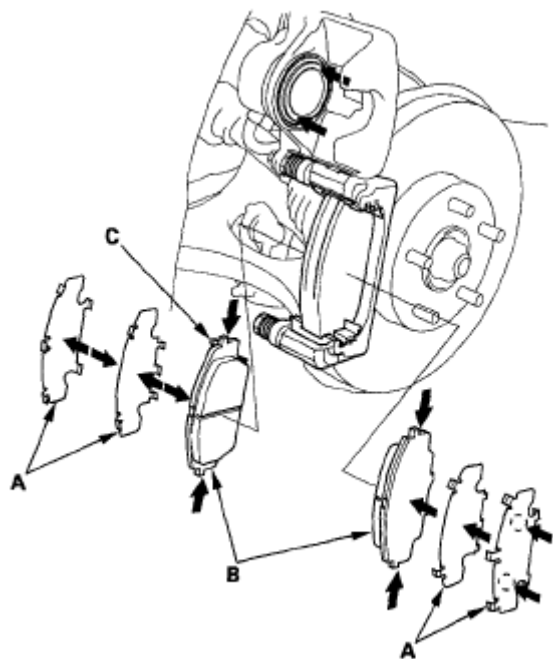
Applying Assembly Paste To Pad Side Of Shims And Brake Pads
